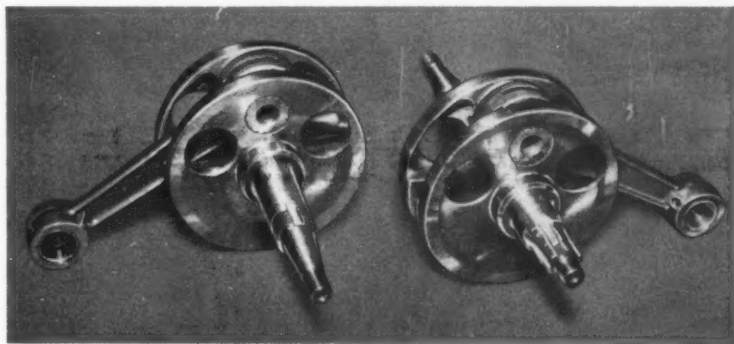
These Two Completed Crankshaft Sub-assemblies Indicate the High Degree of Finish Normally Imparted to Lambretta Engine Components. They are Shown in the Condition in which they are Assembled in the Engine
